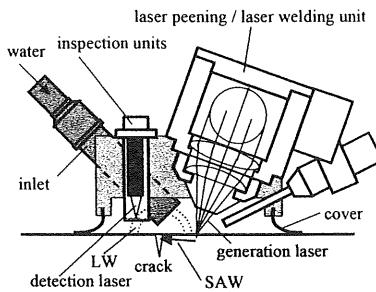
Schematic of laser-induced leaky waves testing with multifunction laser welding head
